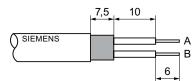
Preparing the ends of the cable for the bus connector with axial cable outlet
